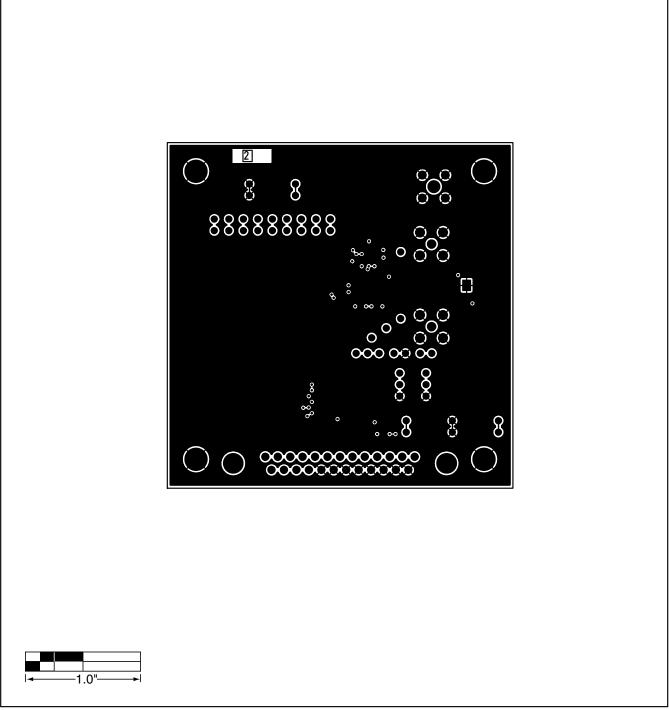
MAX2160 EV Kit PC Board Layout—Inner Layer 2
